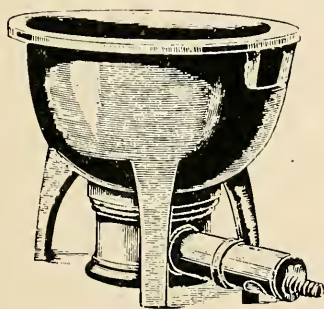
Cast iron gas furnace and ladle for babbitt metal
